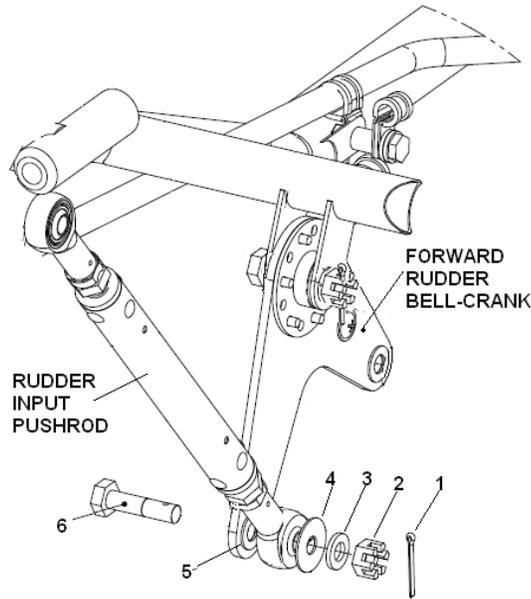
Exploded View of the Input Pushrod to Forward Bell-crank
